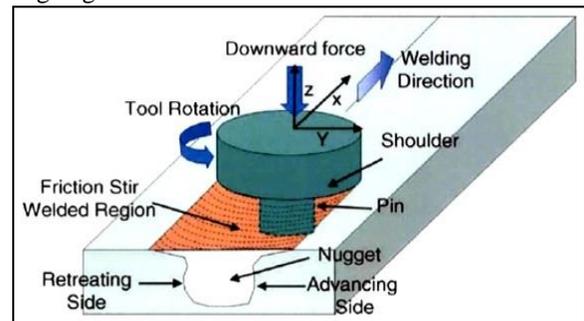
Schematic Drawing of Friction Stir Welding
